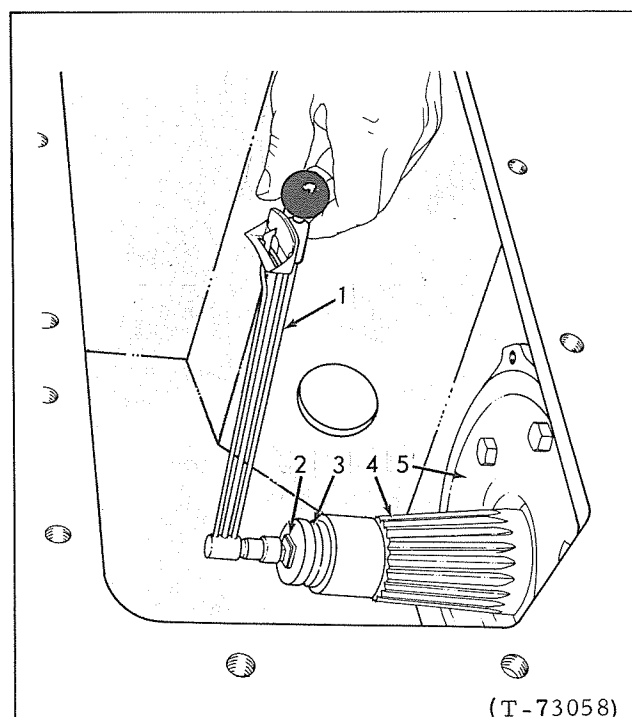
CHECKING PRE-LOAD OF BEVEL GEAR SHAFT BEARINGS
